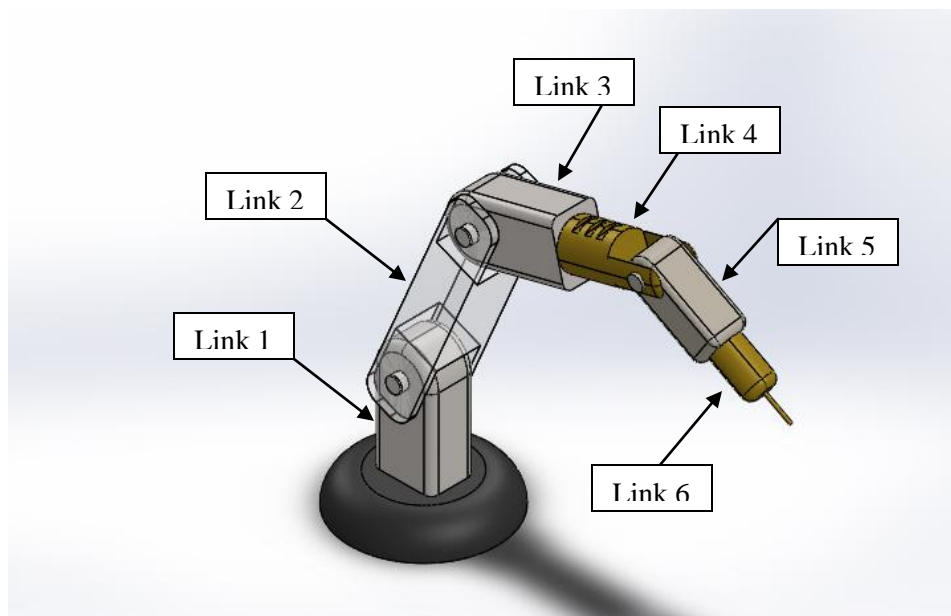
6-DOF of Industrial Robot Arm in Solidworks
